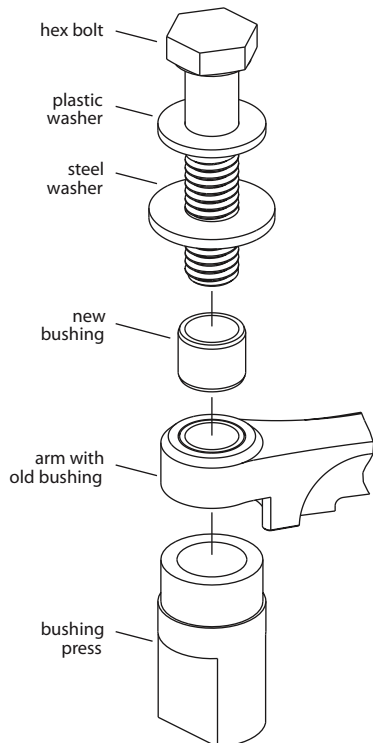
Tighten bolt on replacement tool to push old bushing out and new bushing into place.
